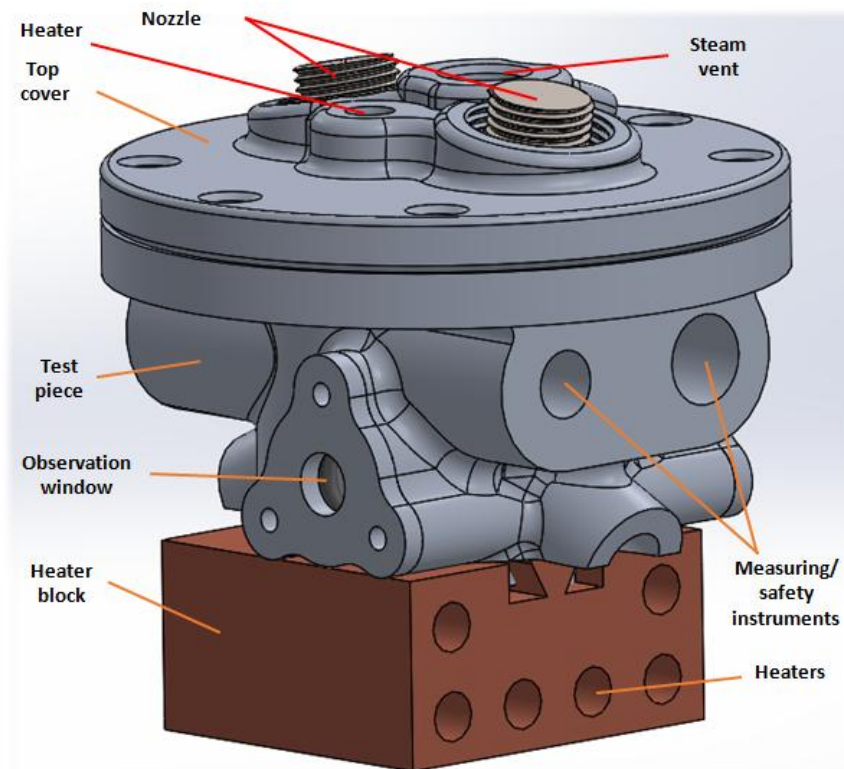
Design of the dynamic cylinder-head geometry spray boiling test piece.
